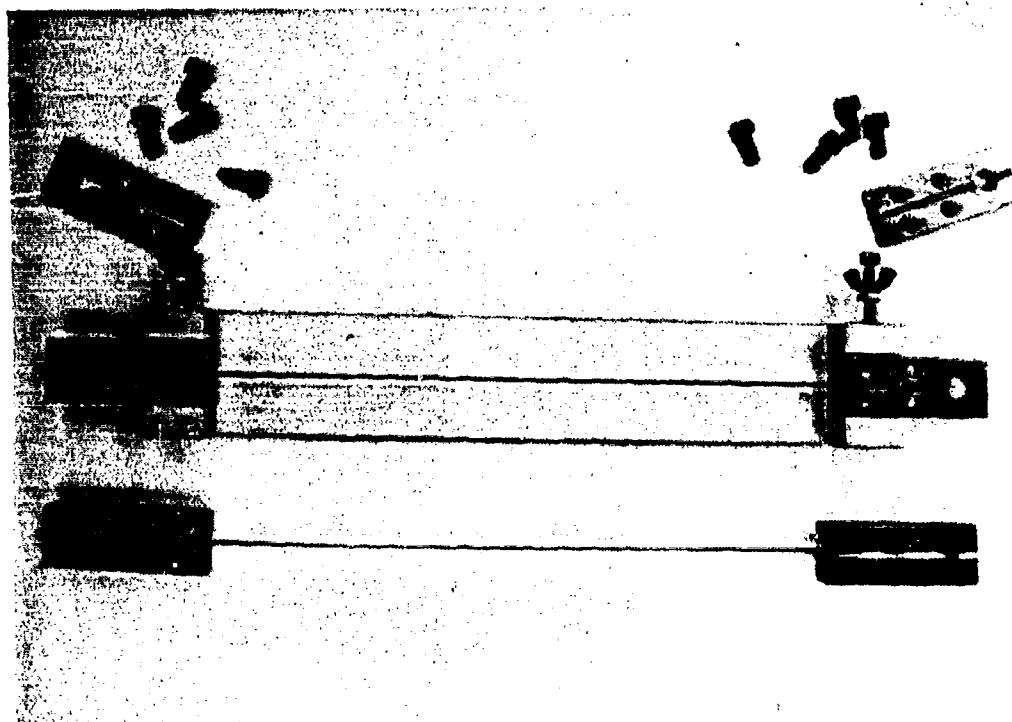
Holders shown in jig used to prepare samples. Gage length is 10 inches.
